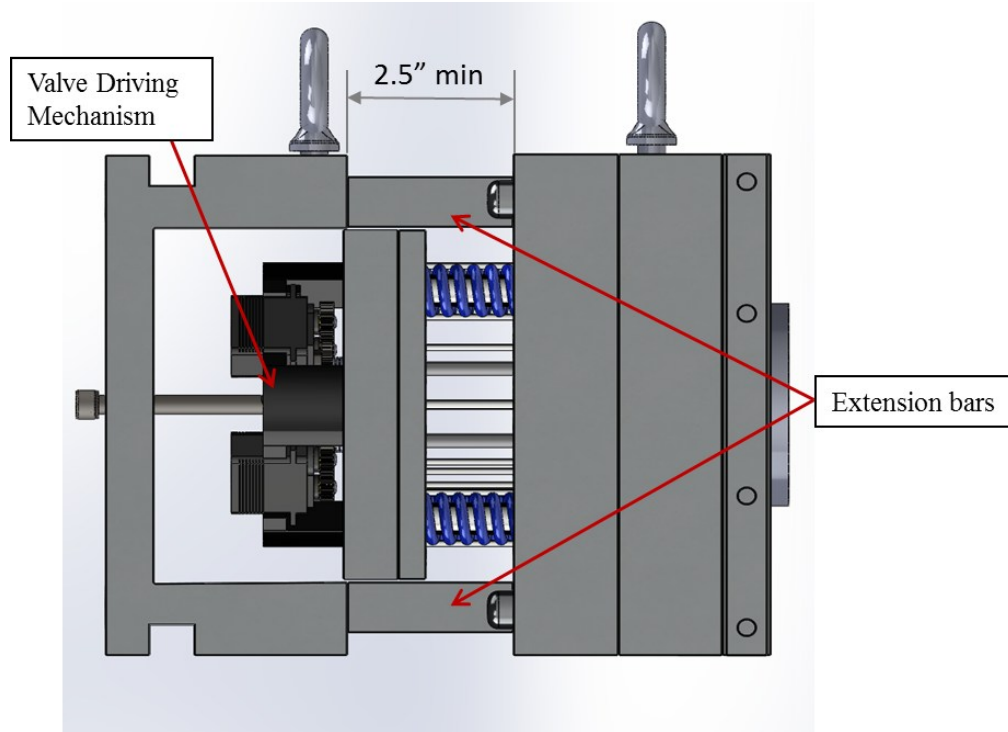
Modular Mold Plate – Driving Mechanism Location
